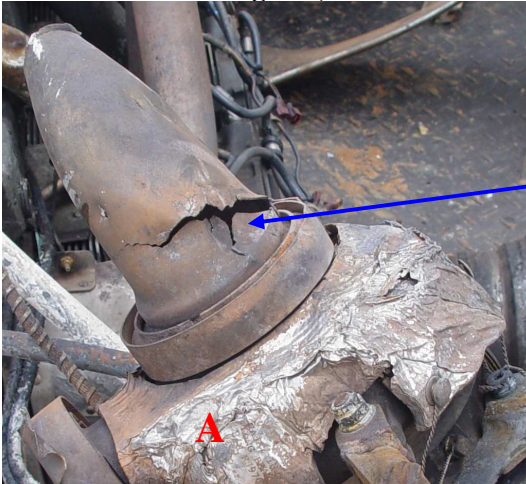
Right hand turbocharger A showing fracture, blue arrow (digital)
